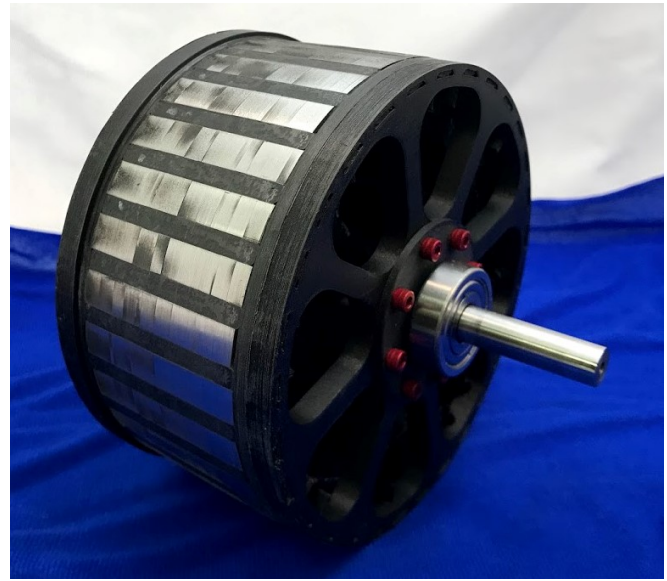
PT-2 sun gear and modulator subassembly ready for assembly with ring gear, with dark lines on modulator pole pieces showing where separations occurred in wire EDM cutting process.
